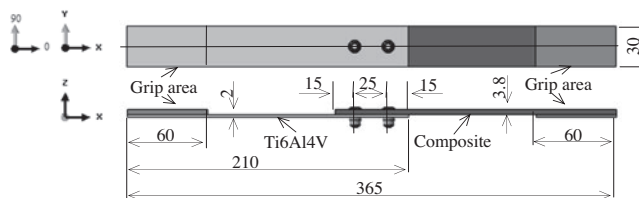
Specimen geometry dimensions (all dimensions in mm).
